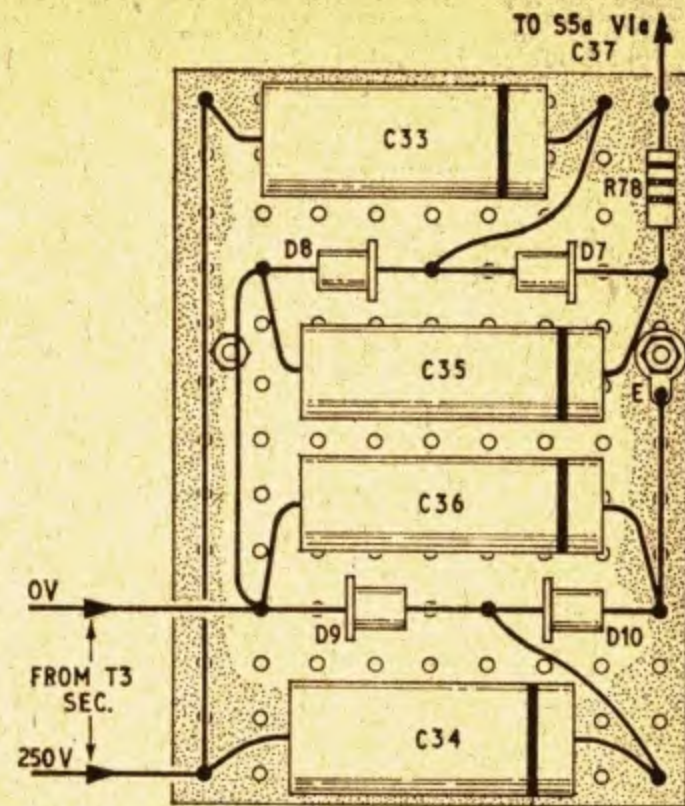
E.H.T. unit tag board. This is mounted on the underside of the main chassis
